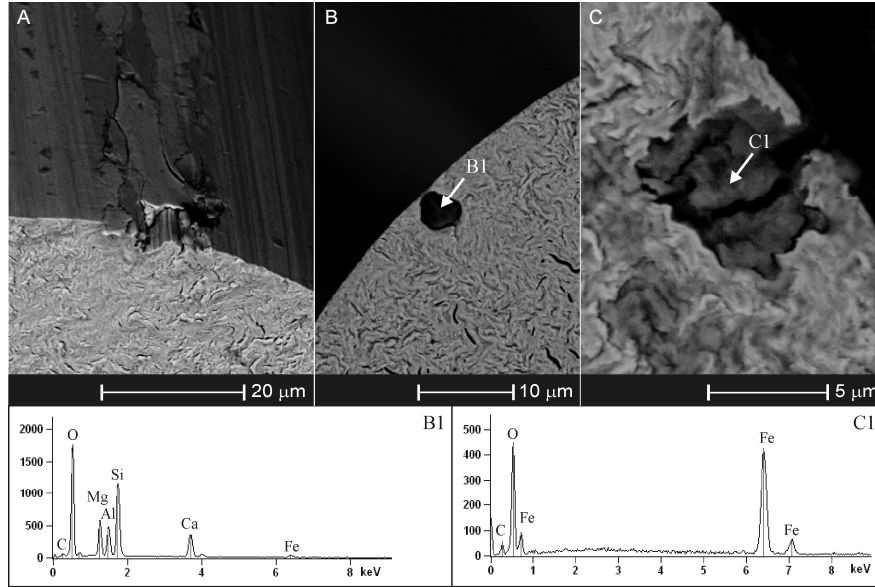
A. Surface defects due to the wire drawing process. B. Surface inclusion. C. Surface oxides.
